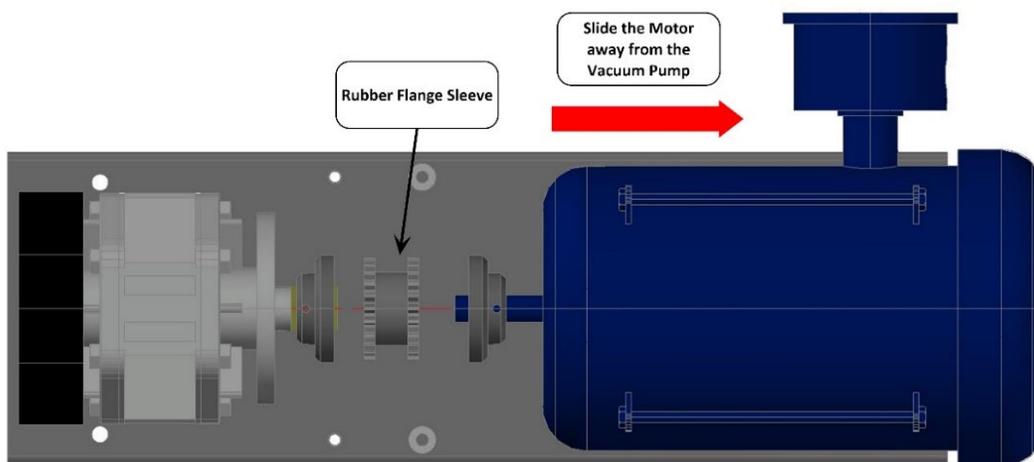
Vac Pump Rubber Flange Sleeve Replacement
